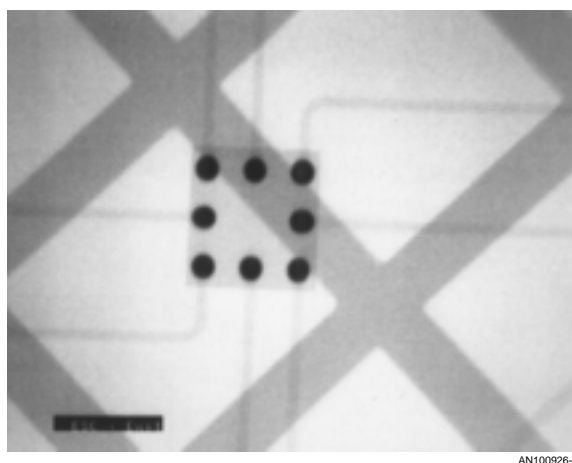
X-Ray Inspection of micro SMD Solder Joints
